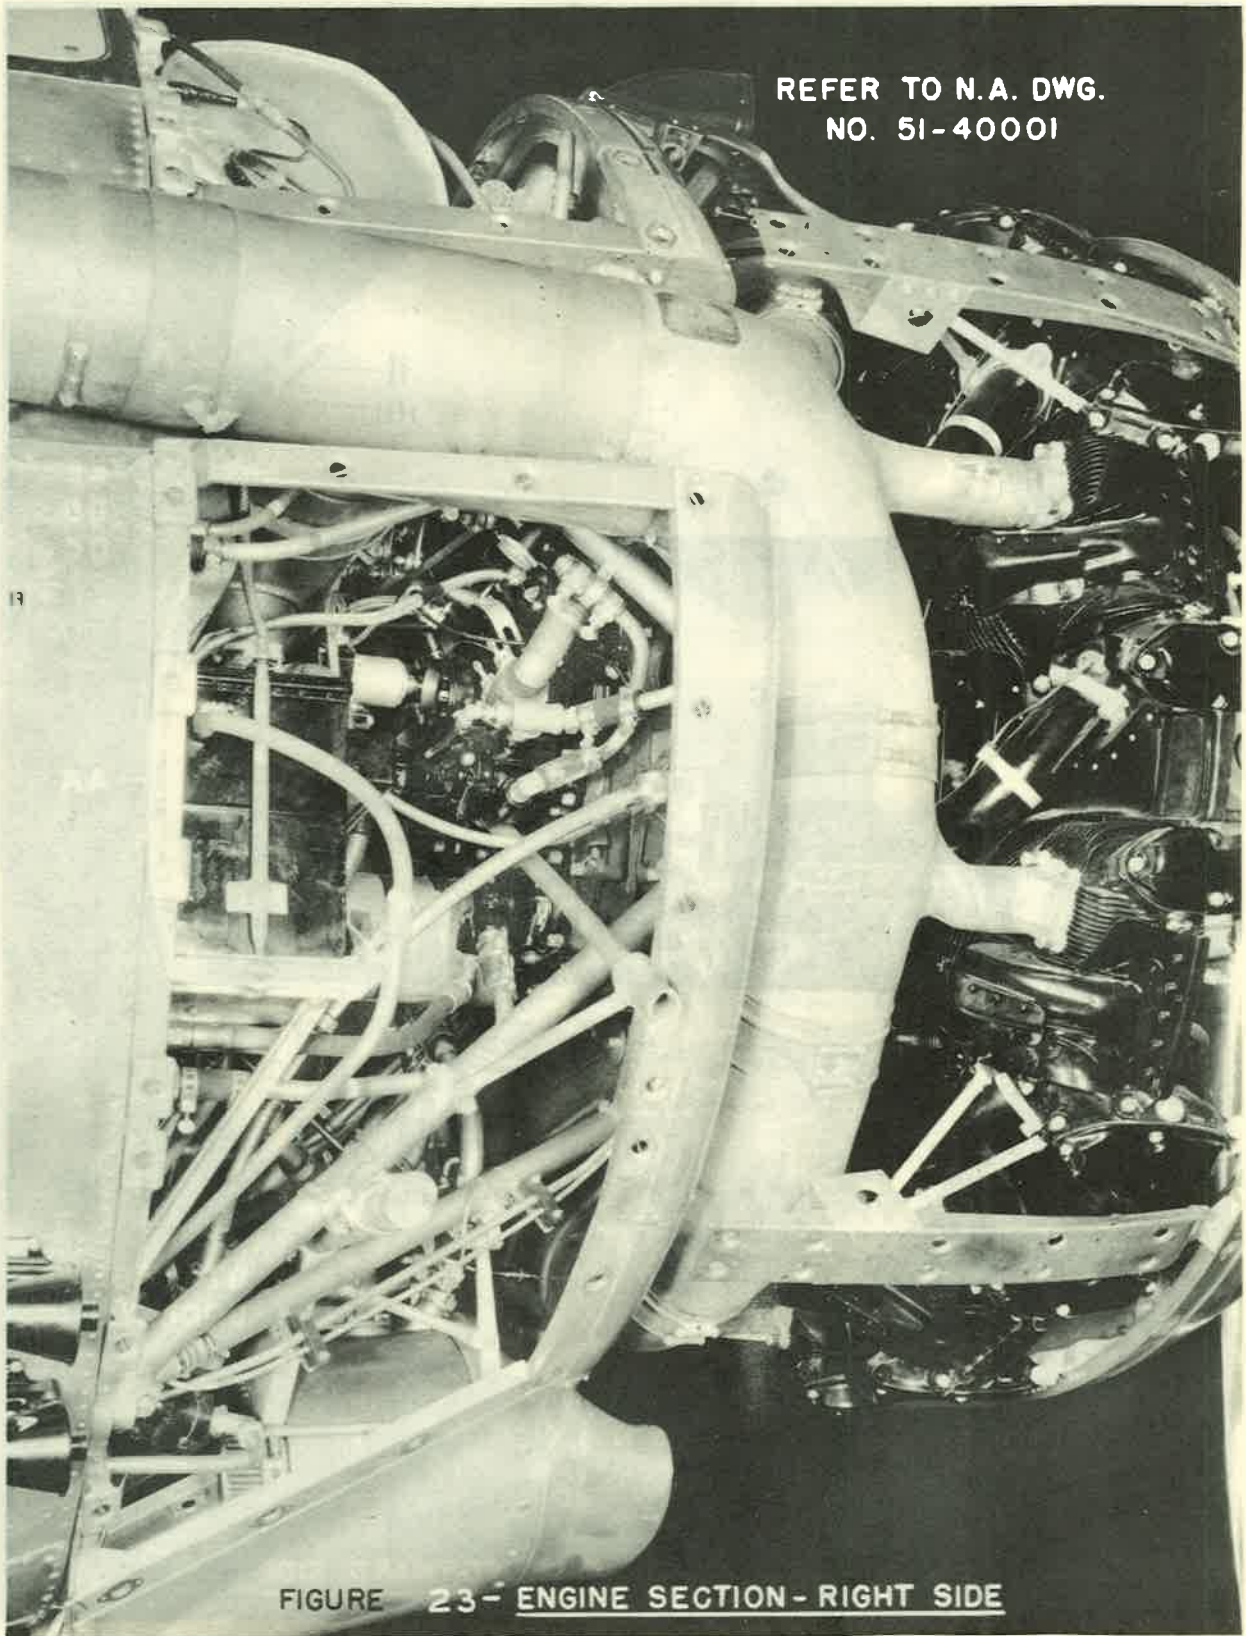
ENGINE SECTION - RIGHT SIDE
